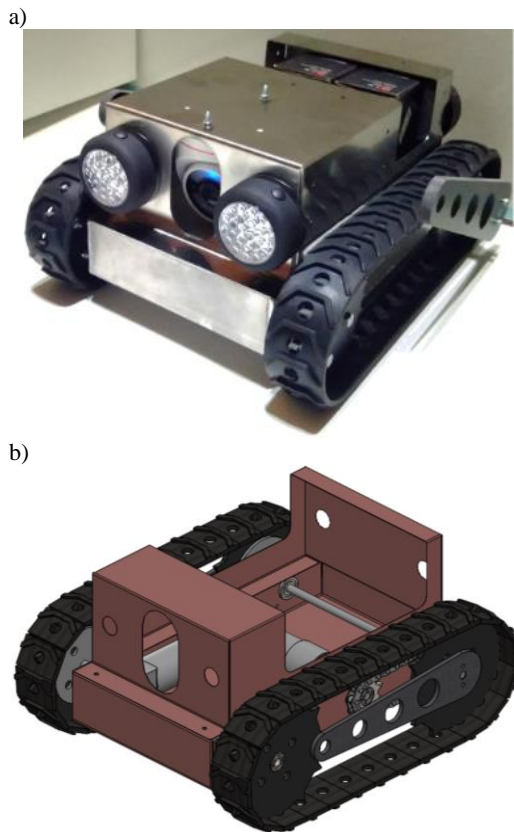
Ground Mobile Robot: a) a built prototype; b) 3D mechanical design
